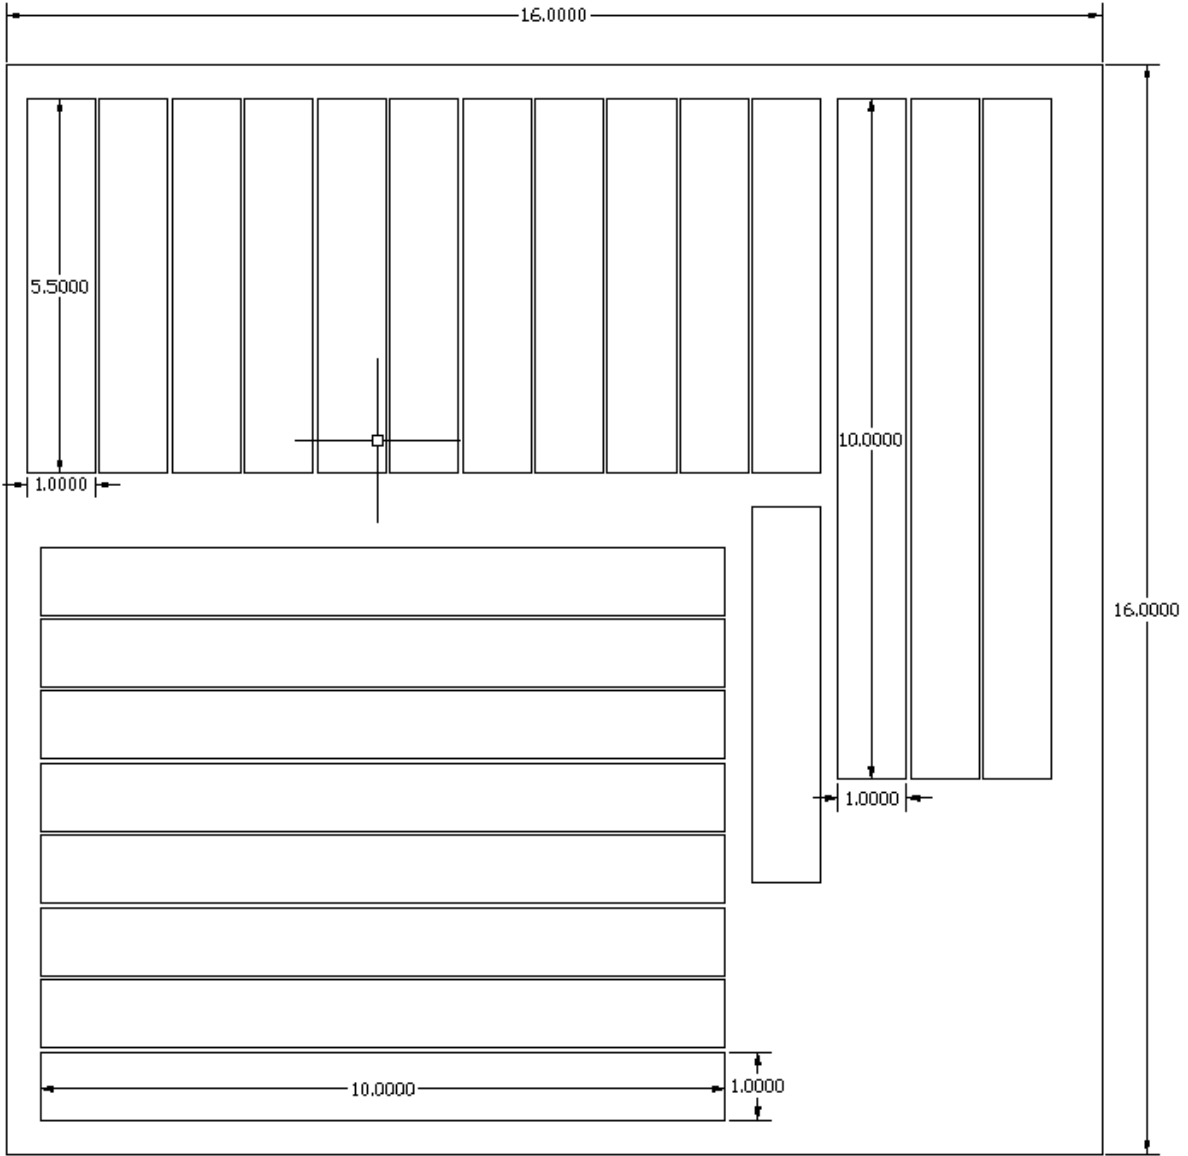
AutoCAD drawing of the 16"x16" plate for waterjet cutting
